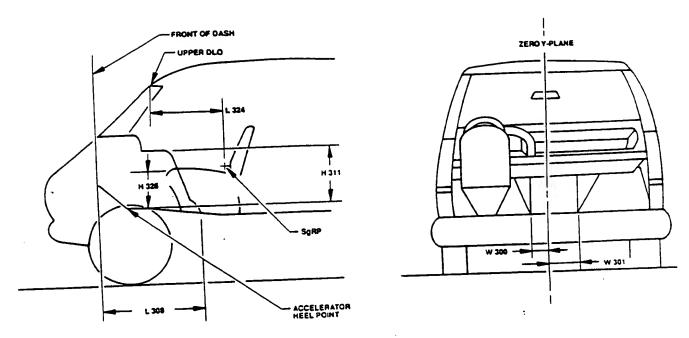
TRUCK INTERIOR DIMENSIONS, ENGINE COMPARTMENT
